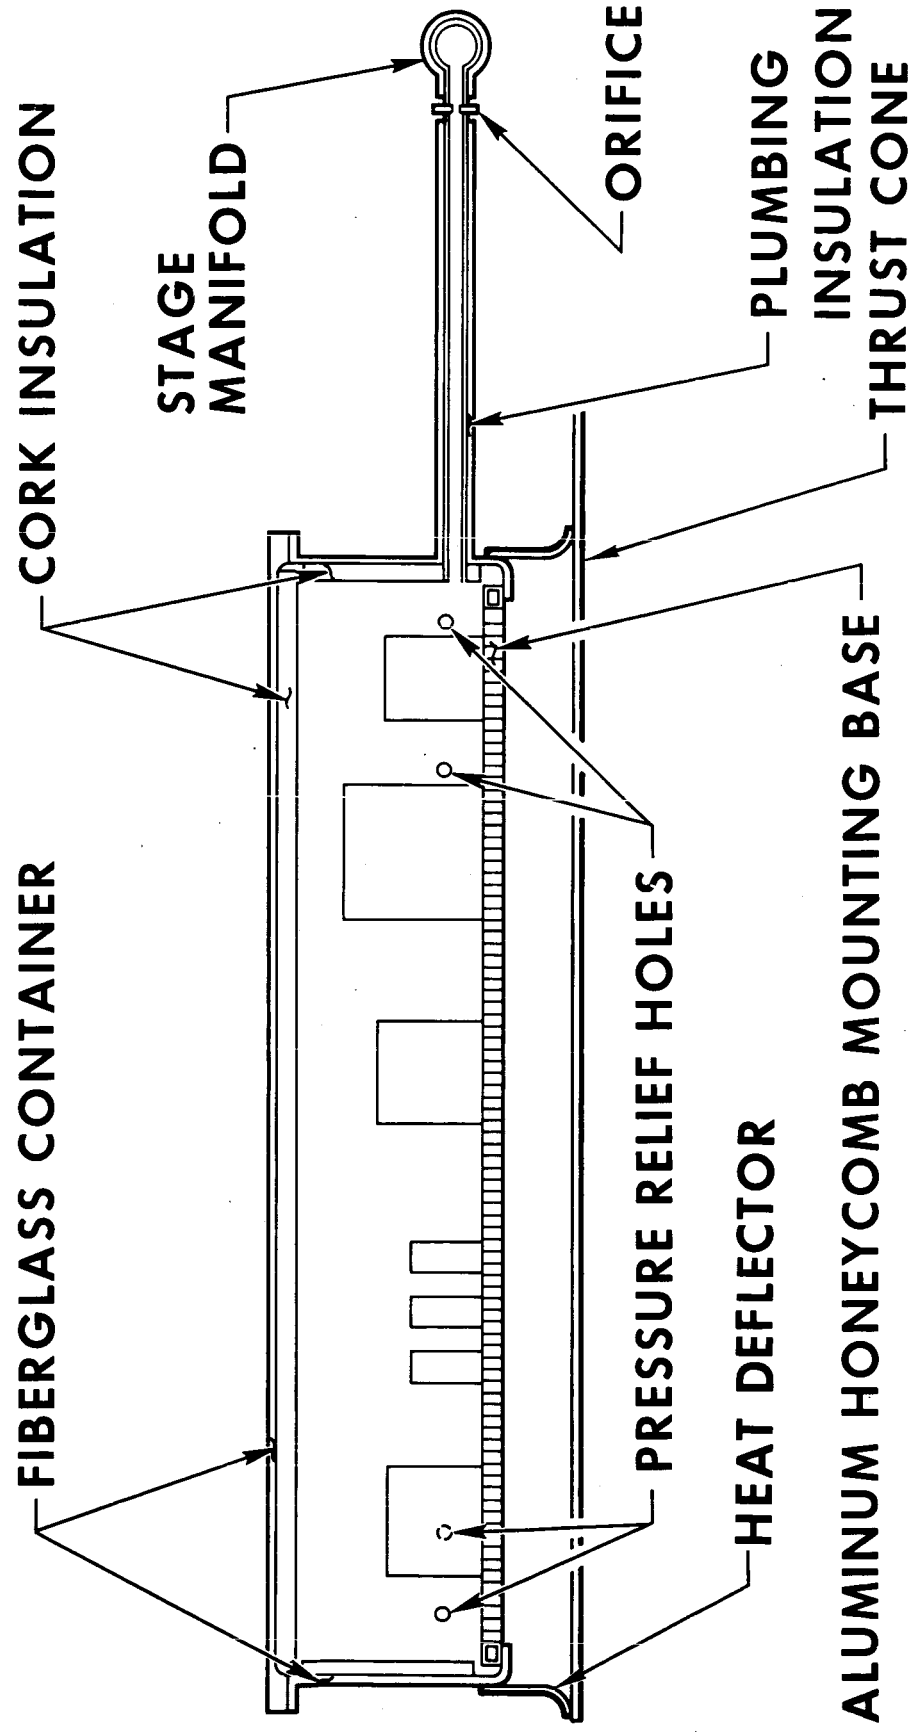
TYPICAL AFT EQUIPMENT CONTAINER
